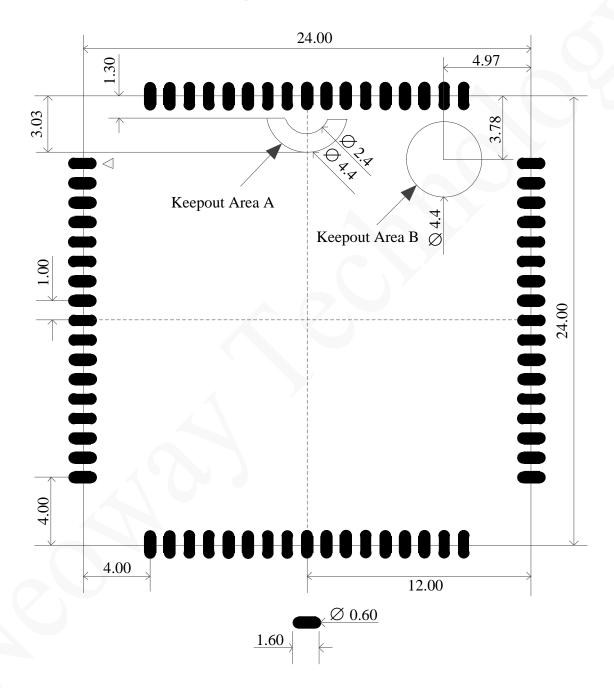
PCB foot print recommended for M660A (unit: mm)
